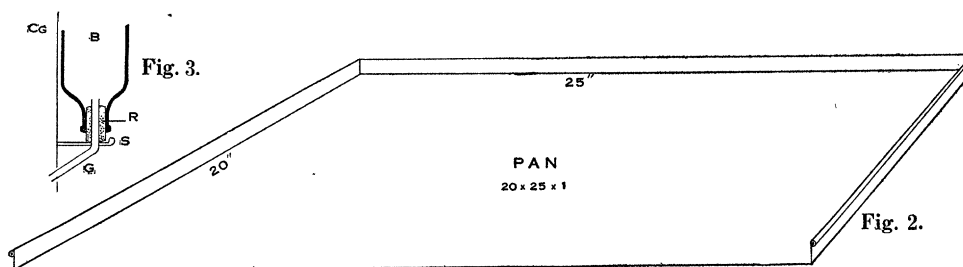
Galvanized iron bottom, giving dimensions and plan of construction.
